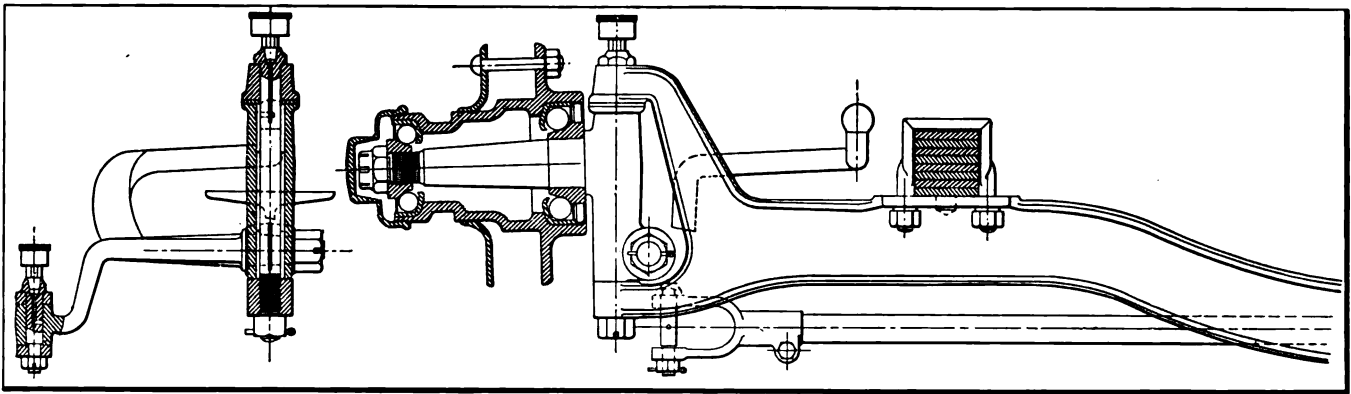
Front axles are mounted on ball bearings of large diameter placed wide apart, and arranged to take thrust, also
